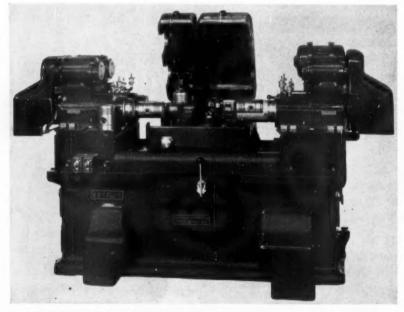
A senior double end precision boring machine for turning five ring grooves, facing dome of piston, facing spherical radius in dome, finish bore wrist pin holes and turn O. D. of piston in one operating cycle.
